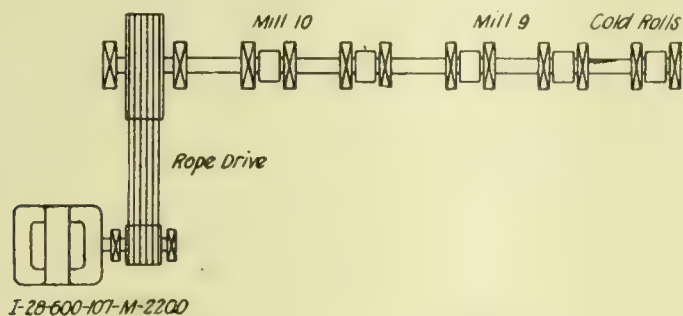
PLAN OF 30IN. FOUR-STAND SHEET MILL.
